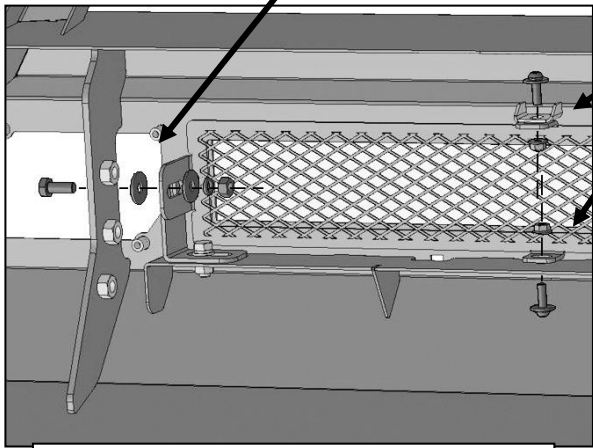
Attach inner "L" Bracket for Mesh Panel or inner bar style LED light installation (optional). Driver/left side illustrated
